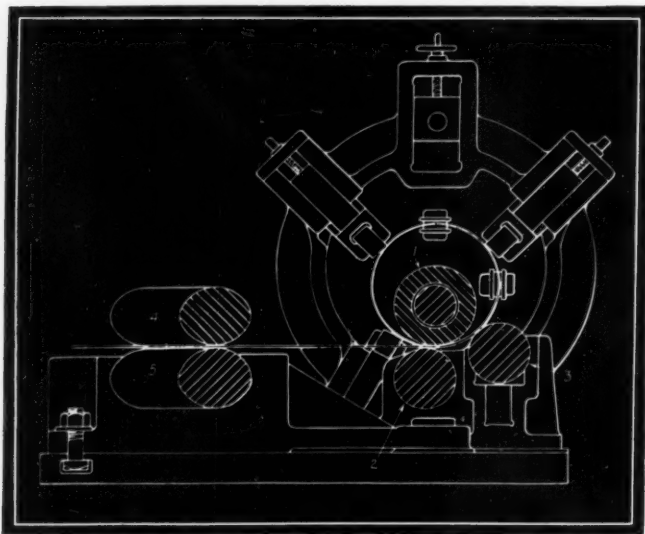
Section of machine through the rolls. Note guards for holding strip after bending
